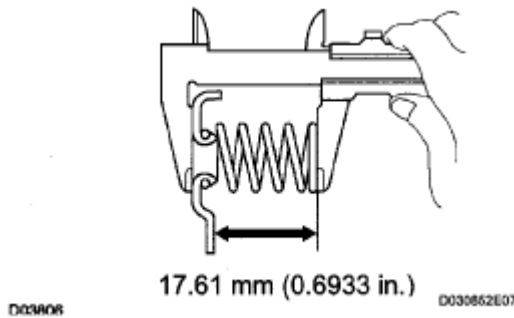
Measuring Free Length Of 1st And Reverse Brake Return Spring
